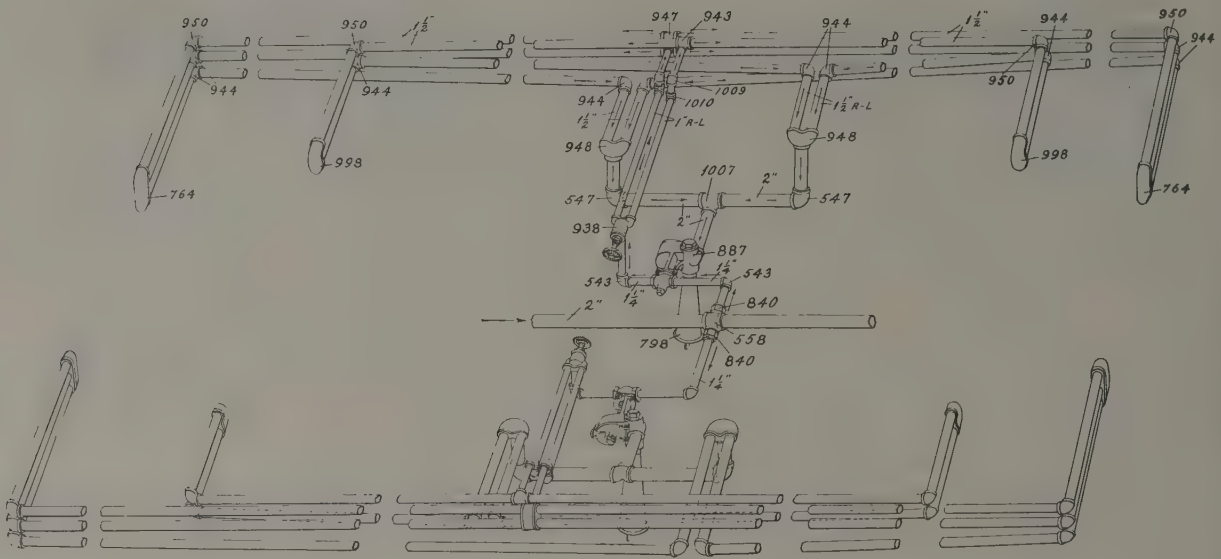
Gold Vapor System for Steel Passenger Cars.
